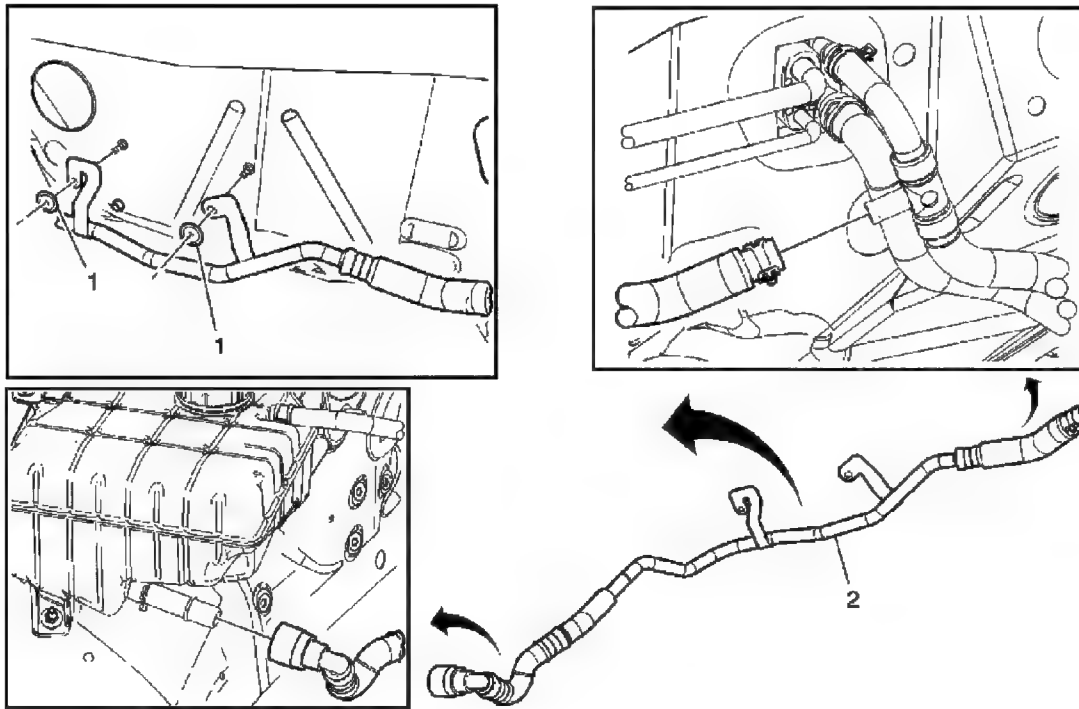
View Of Surge Tank Outlet Hose/Pipe
